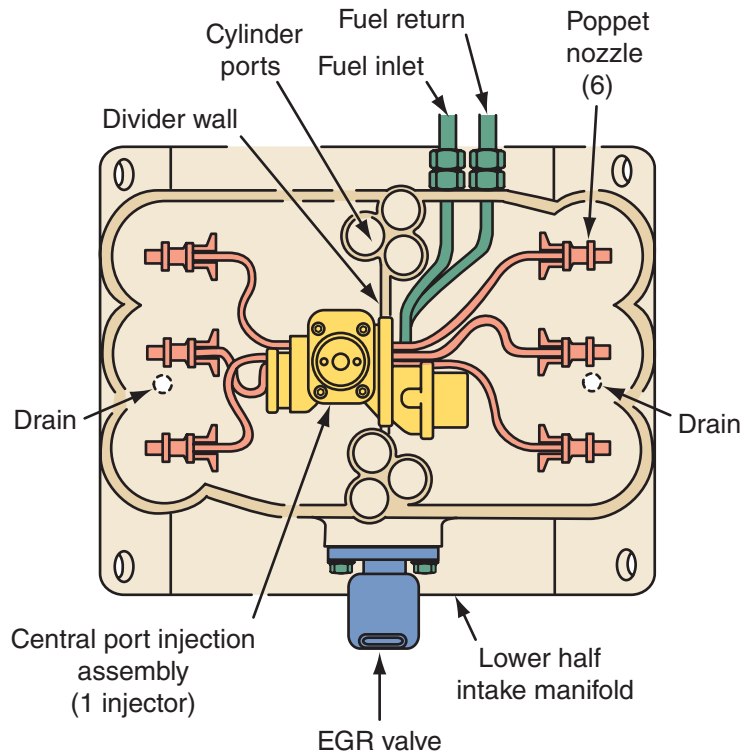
Central multiport fuel injection components in the lower half of the intake manifold.
